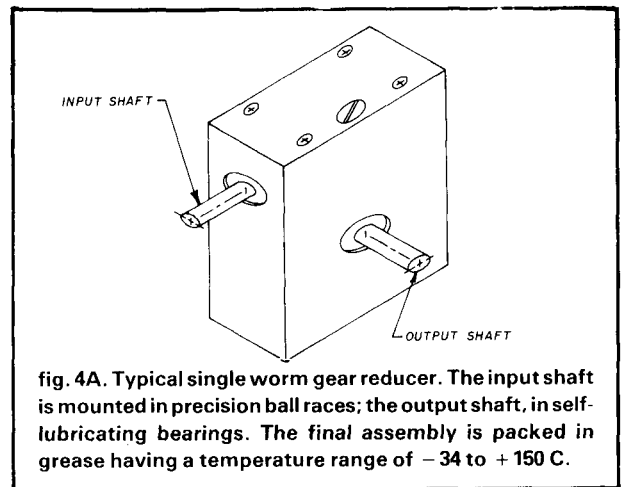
A. Typical single worm gear reducer. The input shaft is mounted in precision ball races; the output shaft, in self-lubricating bearings. The final assembly is packed in grease having a temperature range of -34 to +150 C.
